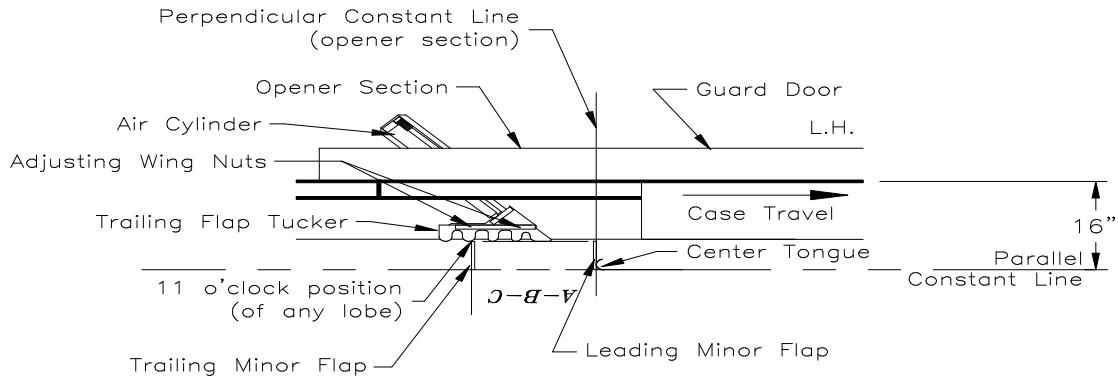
ADJUSTING TRAILING FLAP TUCKER ARM
